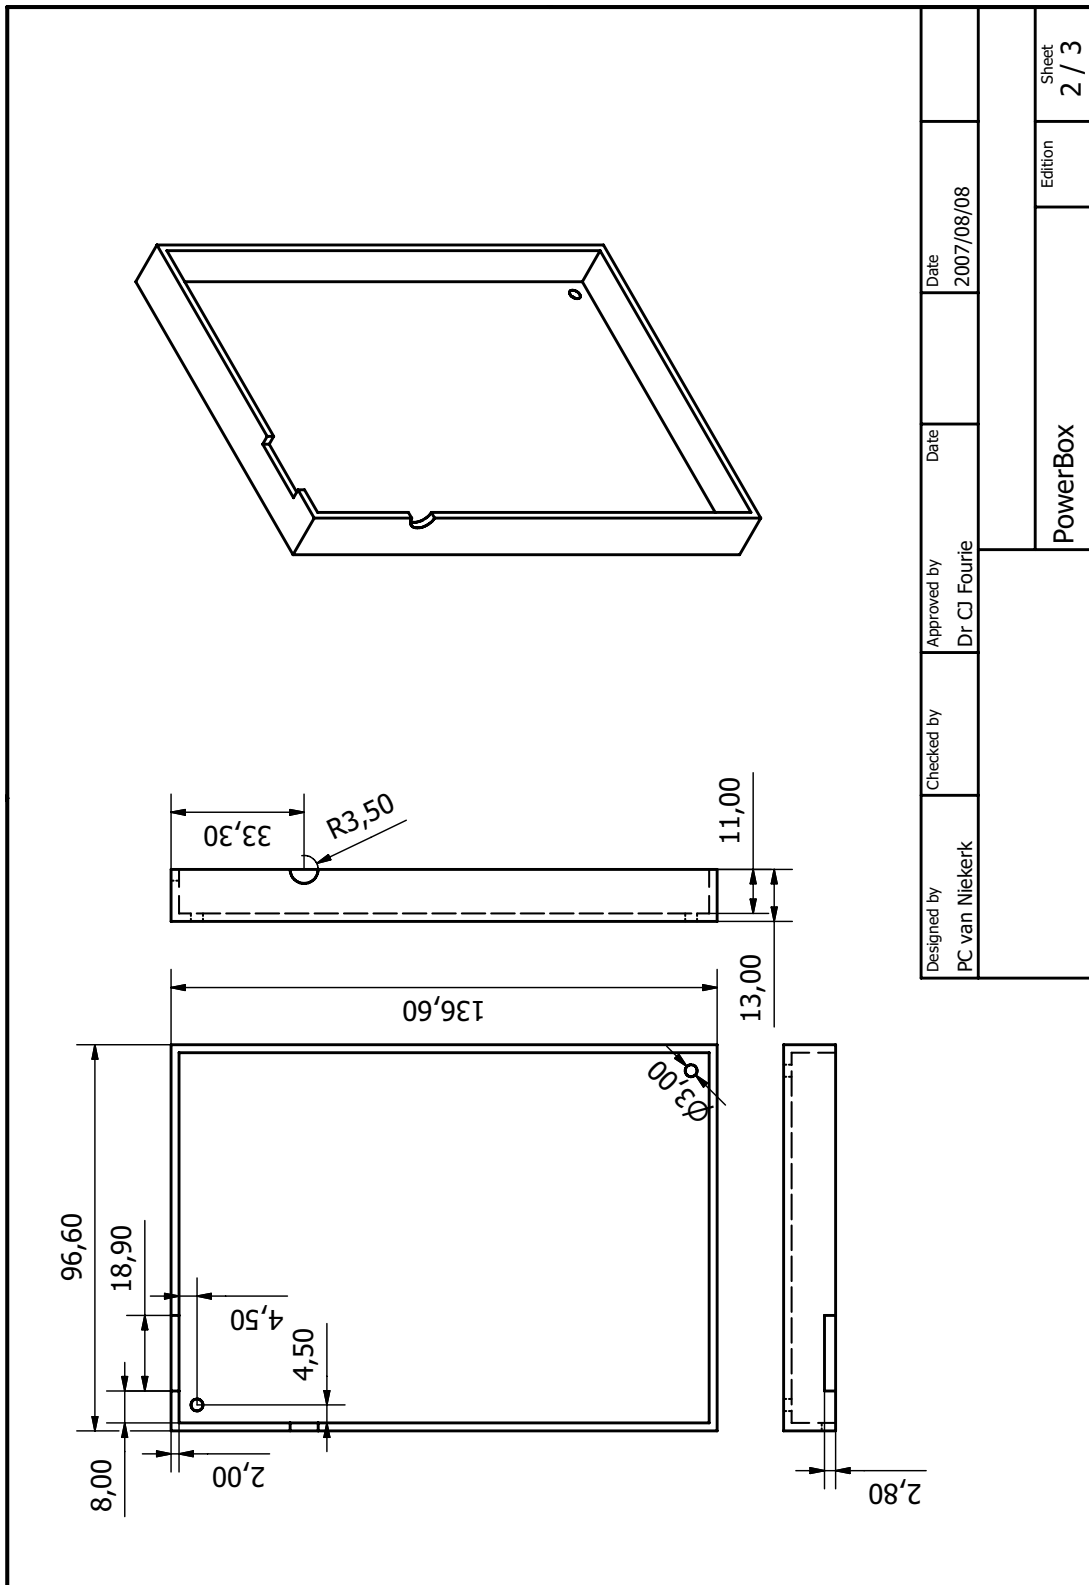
The top part of the power box, containing the power PCB in Fig. A.10.
